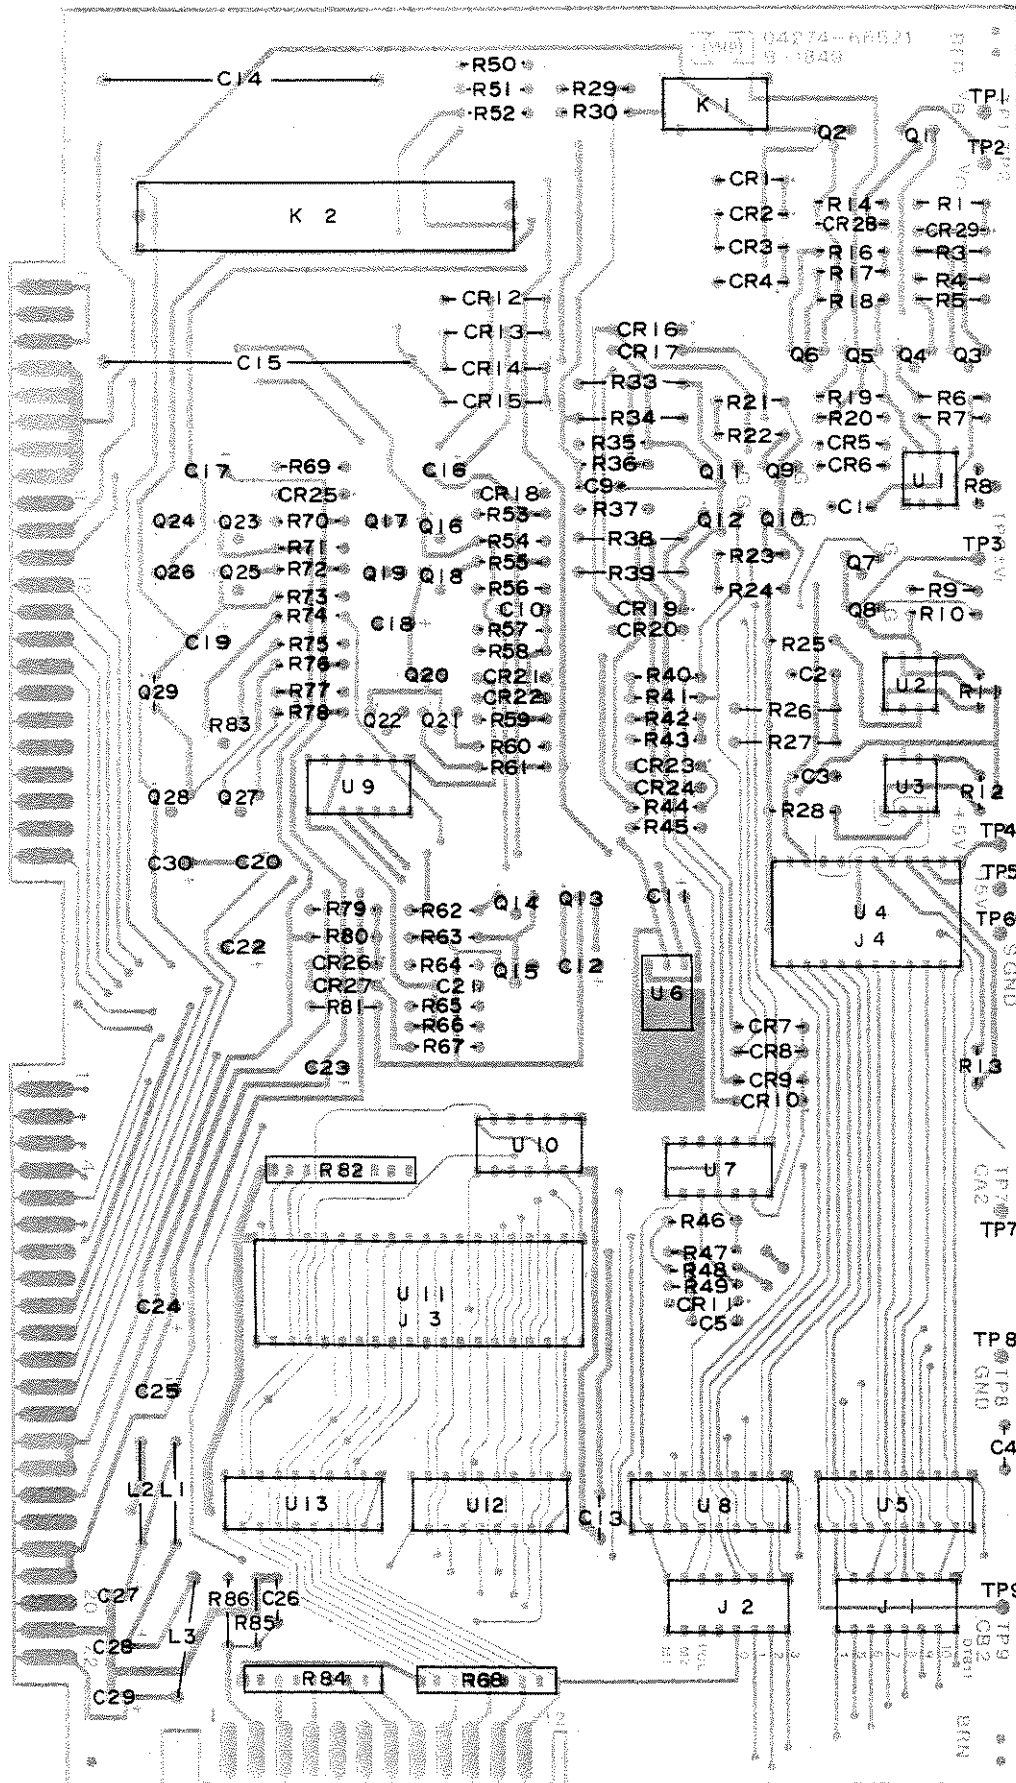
A21 DC Bias Supply Board Assembly Component Locations.
